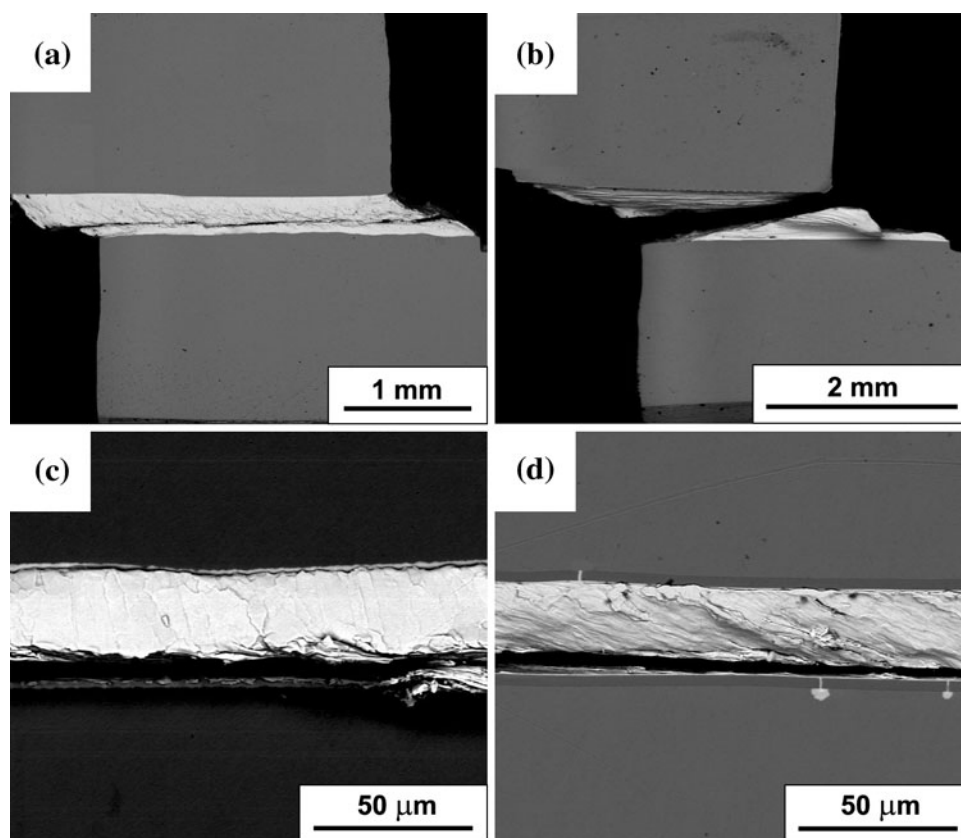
Fractographs of: (a) Sn/Cu solder joint with gap size of 300 μm , (b) Sn/FeNi solder joint with gap size of 300 μm , (c) Sn/Cu solder joint with gap size of 20 μm , and (d) Sn/FeNi solder joint with gap size of 20 μm .
